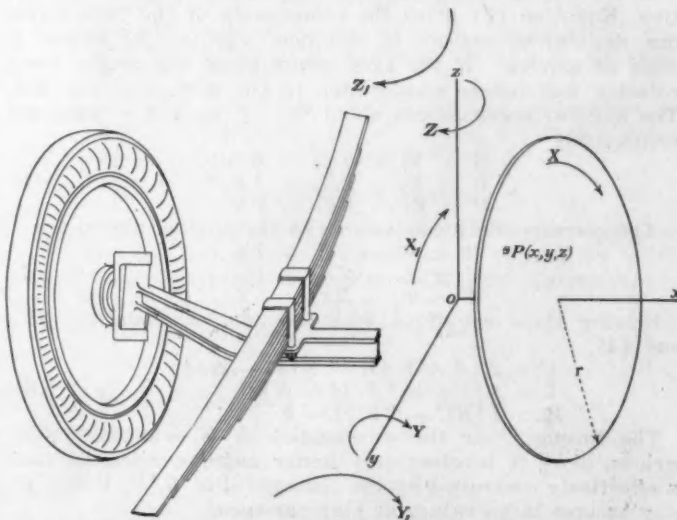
CONVENTIONAL LEFT-FRONT WHEEL, STEERING-KNUCKLE AND AXLE-BED, WITH GEOMETRICAL EQUIVALENT IN PLACE OF RIGHT-END ASSEMBLY
